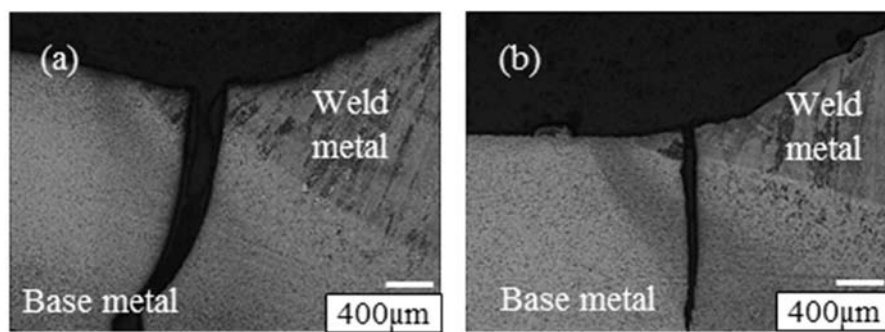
Crack initiation area around weld toe. (a) Joggled lap joint, (b) conventional lap joint.
